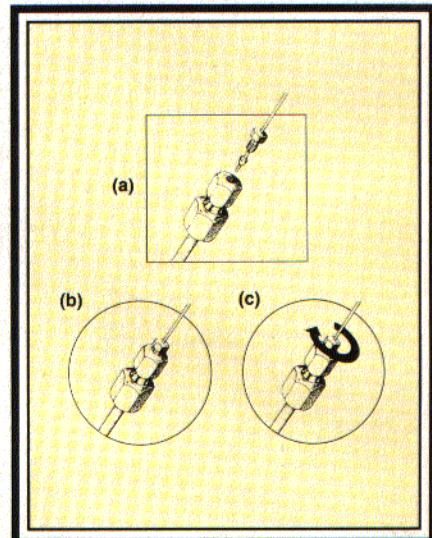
Internal column endfitting. (a) Exploded diagram, showing nut, ferrule, and tube end about to be inserted into fitting body. (b) First step in fitting assembly: Finger-tighten nut. (c) Final step in fitting assembly: Turn nut a three-quarter turn past finger-tight to swage ferrule onto the tube end.
